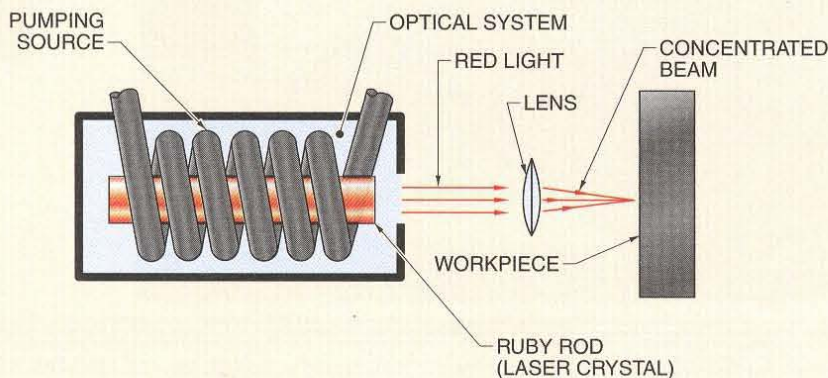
The LBW machine has a concentrated beam that is focused on the workpiece with an optical system.
